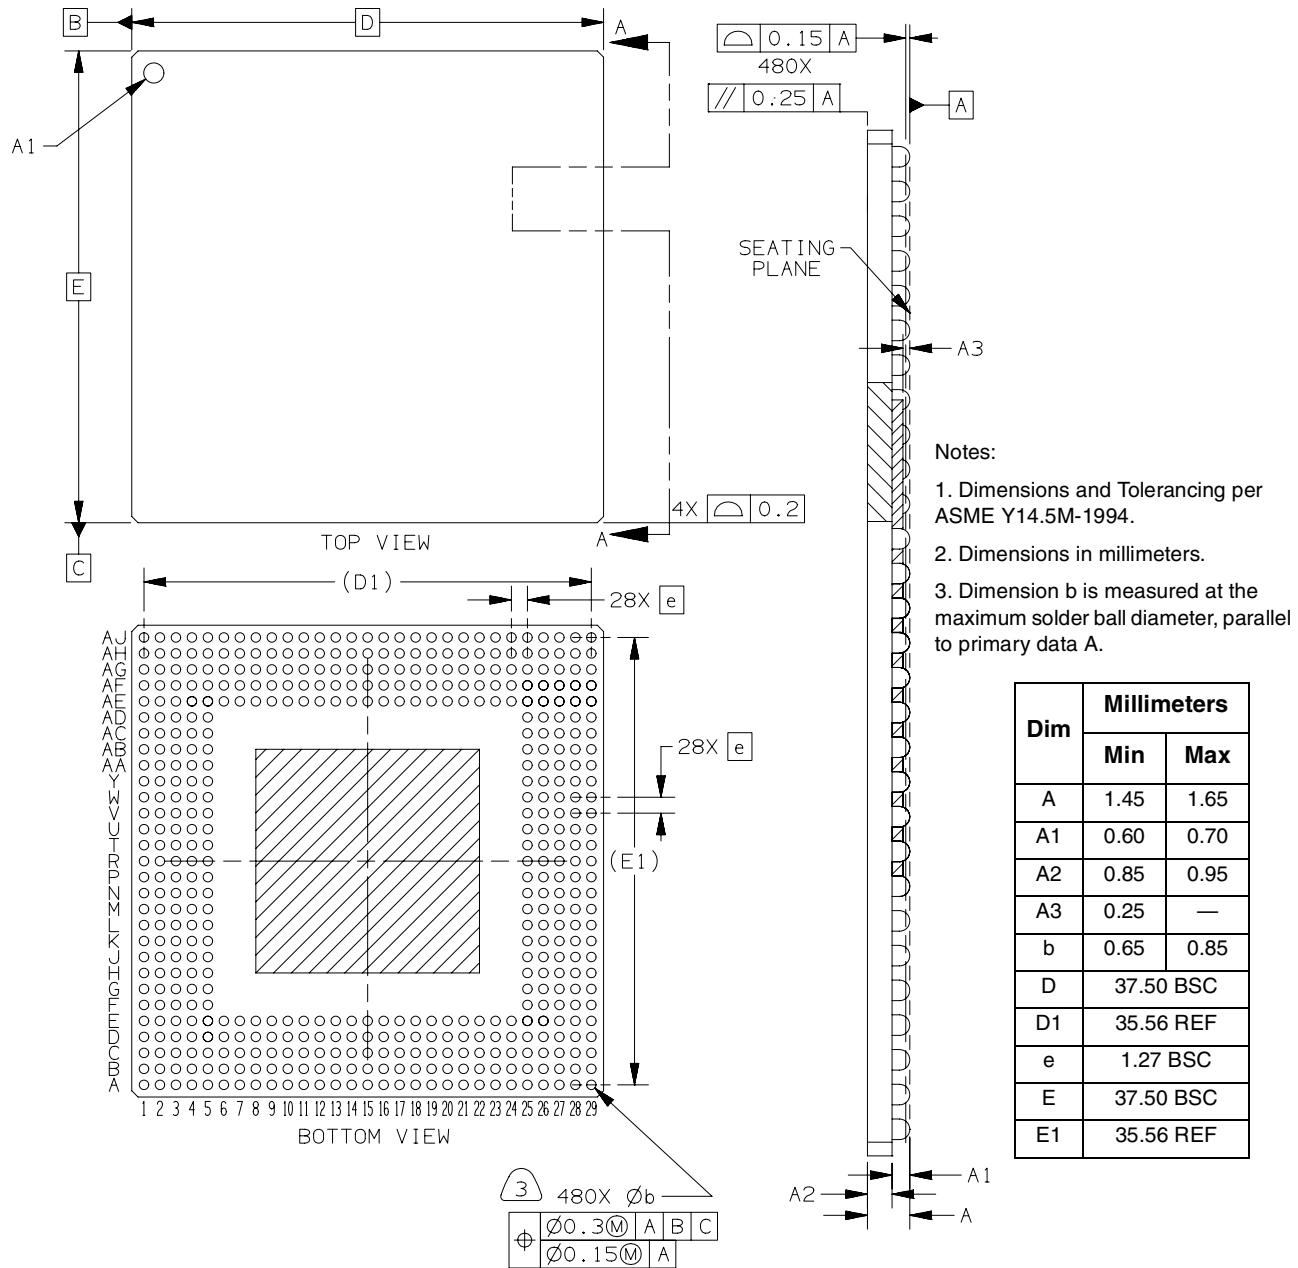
Mechanical Dimensions and Bottom Surface Nomenclature
